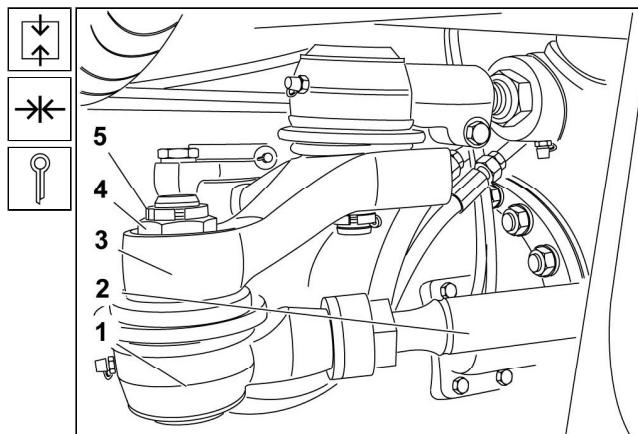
Connection of steering rod with the double steering arm - installation
